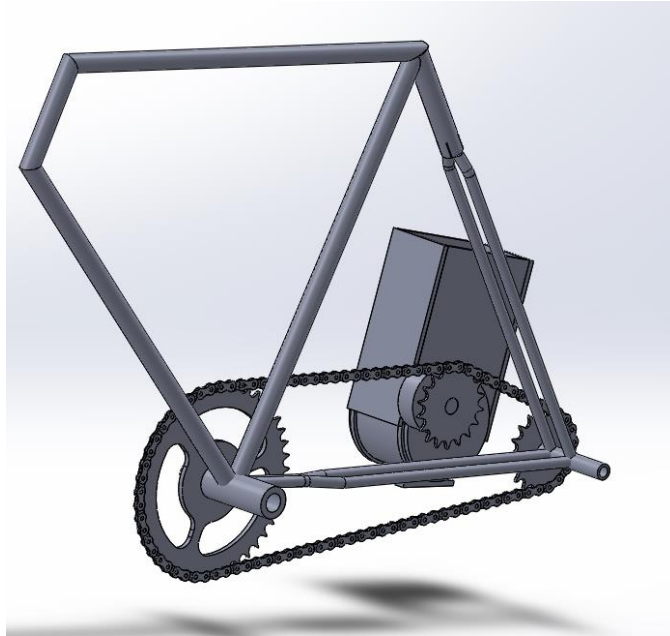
Isometric view of kinematic analysis of mechanism with the kit
